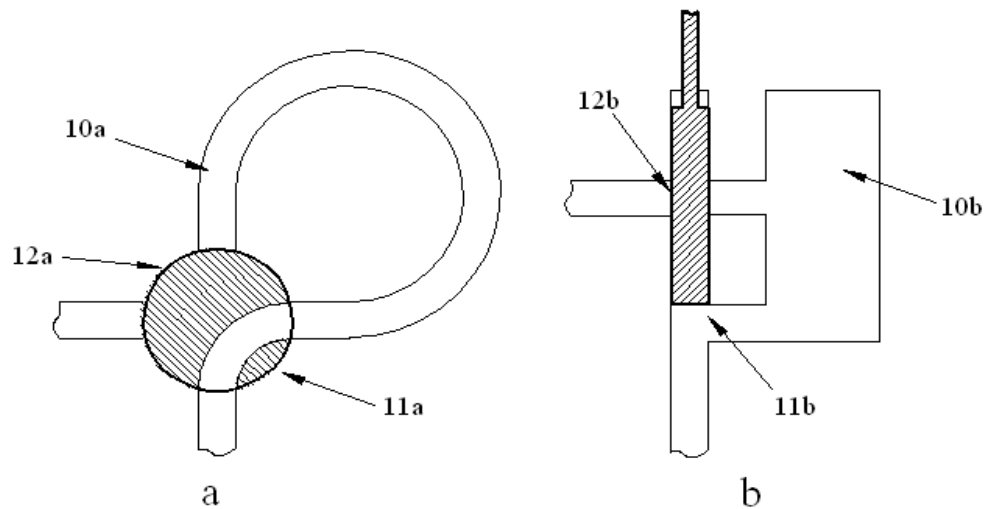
Proposed ERV designs; rotary valve (a) and poppet valve (b) type.
